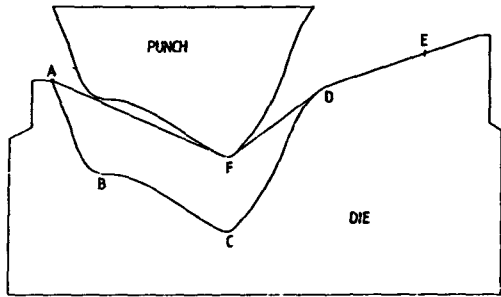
Deformed pattern at 30mm punch displacement (arbitrarily-shaped tools)
